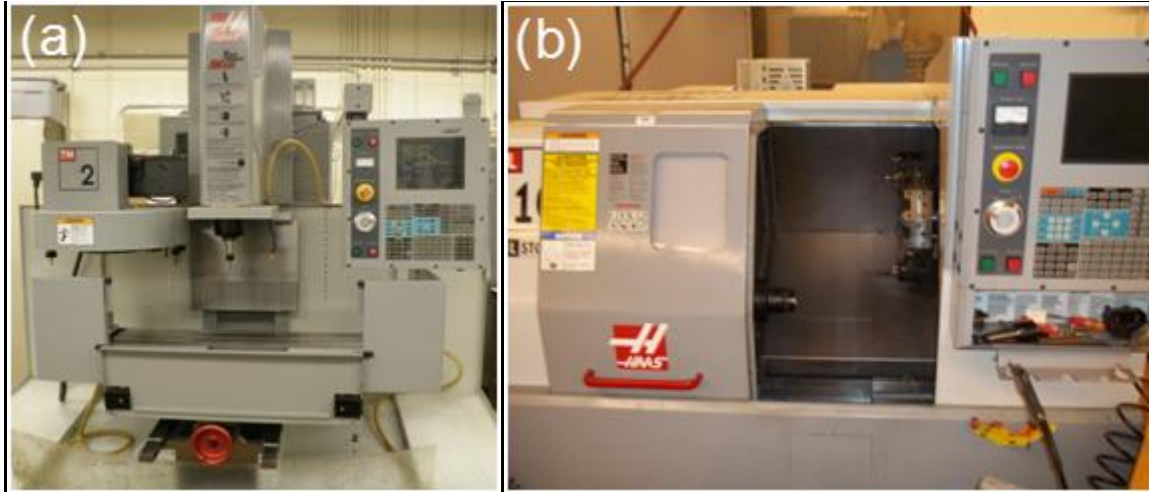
Photograph of (a) CNC Mill (Haas model TM-2) and (b) CNC Lathe (Haas model SL-10)
